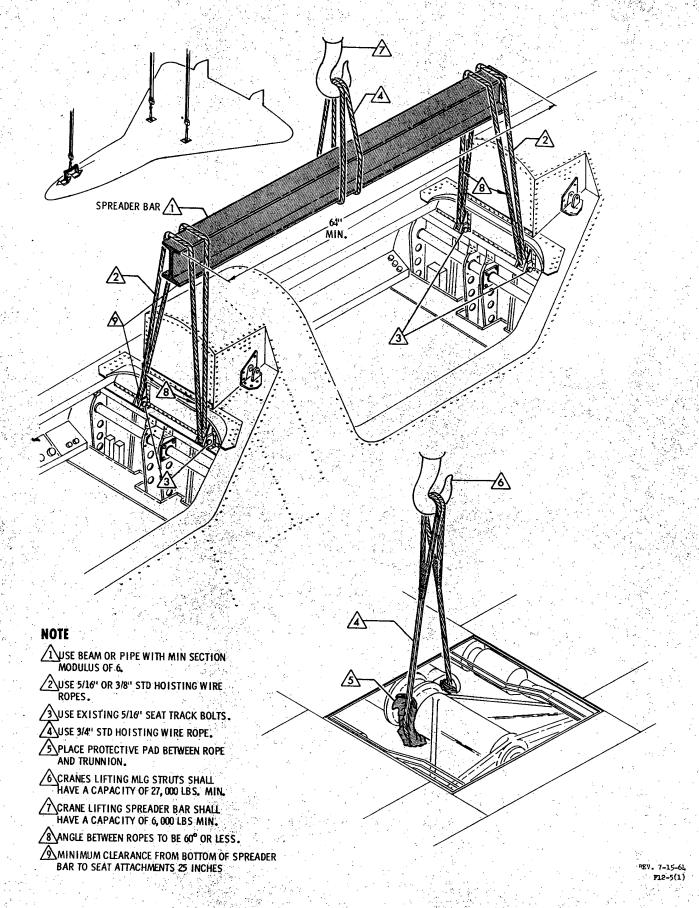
Crane Lifting. (Sheet 2 of 2)
